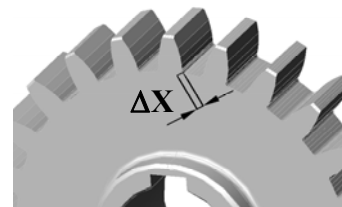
The modelled wheel defect in the form of a crack in the tooth root
